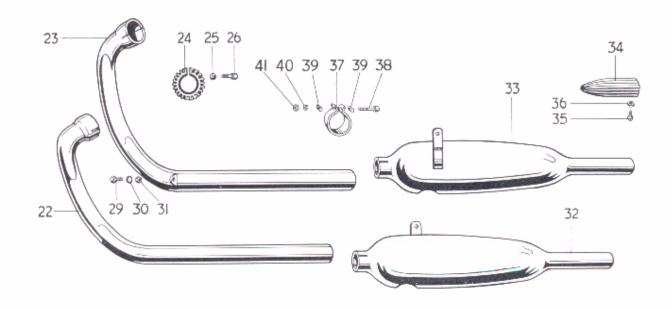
ENGINE FITTINGS AND EXHAUST SYSTEM
